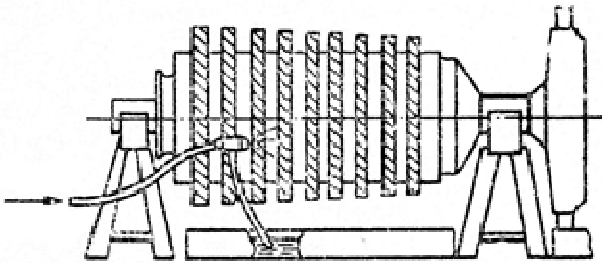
The chart of cleaning of the axial compressor rotor: 1 - the compressor rotor; 2 - bearings; 3 - the reservoir with a mixture of water and marshal; 4 - the nozzle
